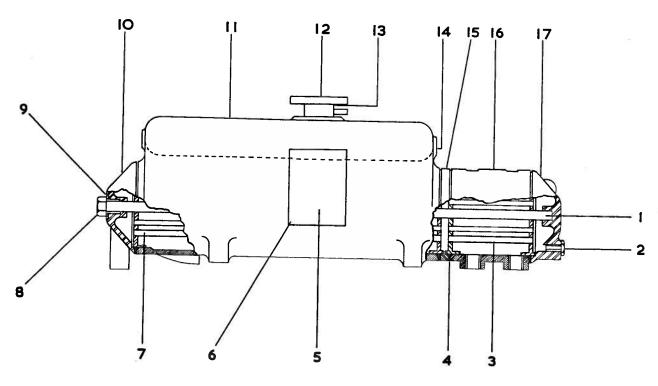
Combined Heat Exchanger and Oil Cooler Sectioned View
